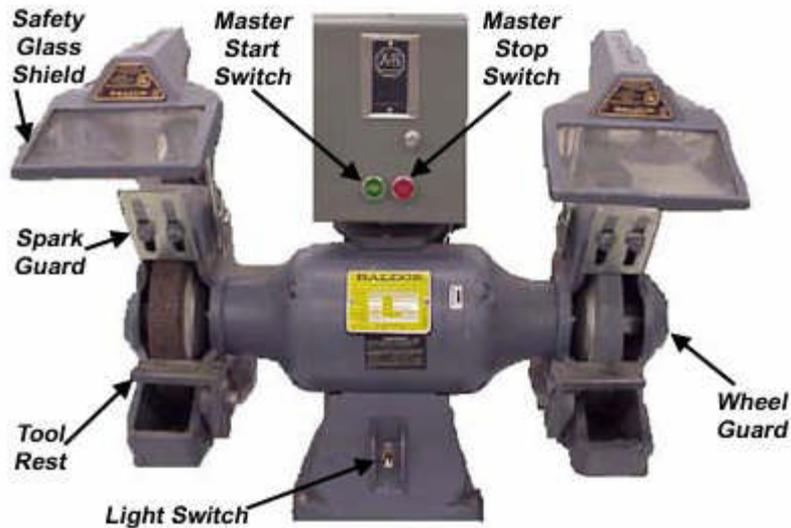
24: The Grinding Machine for Grinding Cylindrical Surfaces
